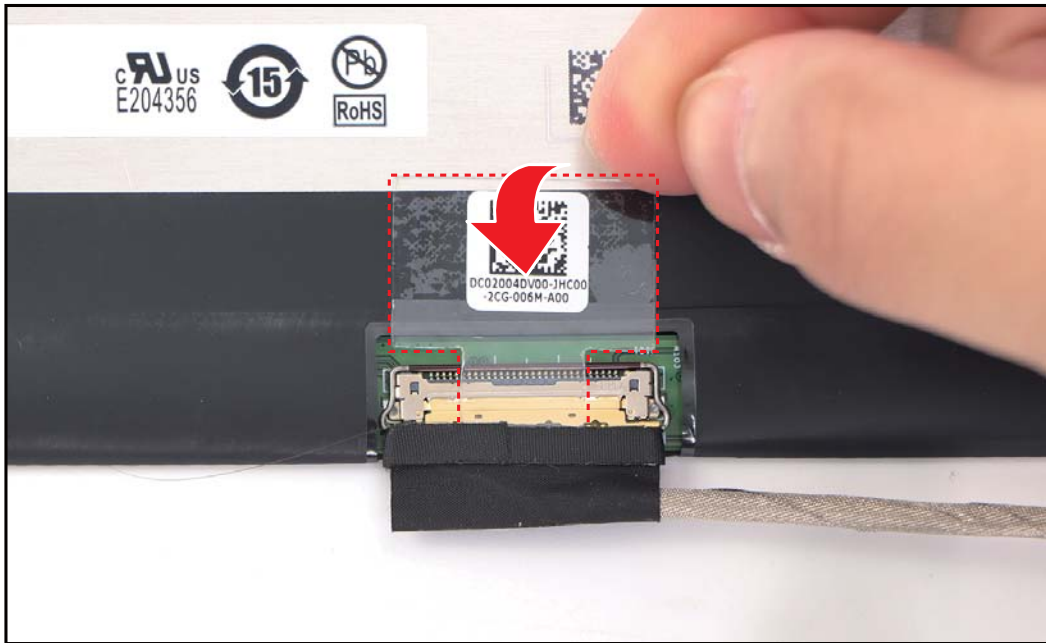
Detaching the Double-sided Mounting Tapes
